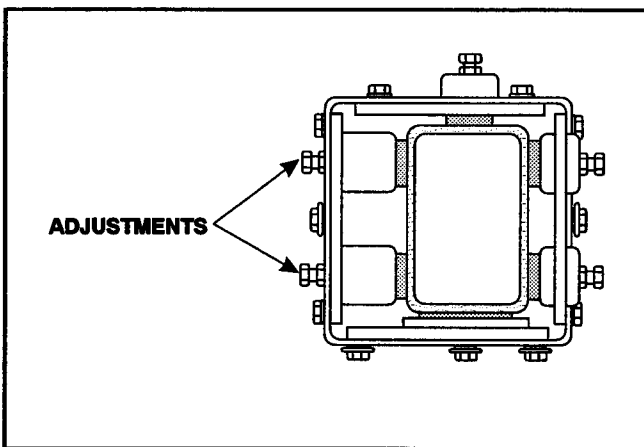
Location Of Components - Front Base Boom Wear pad Adjustments.
